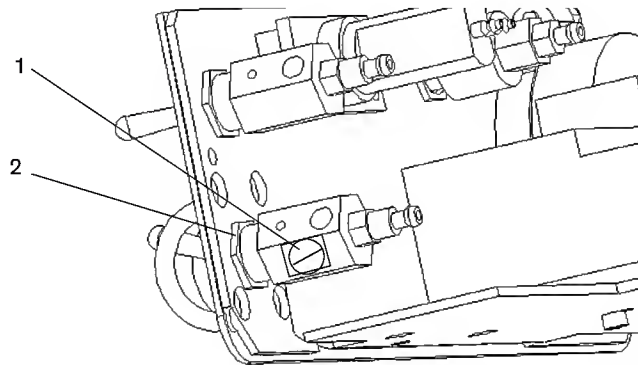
View of the drawer unit of the Oxylog 1000, loosening the lock nut
